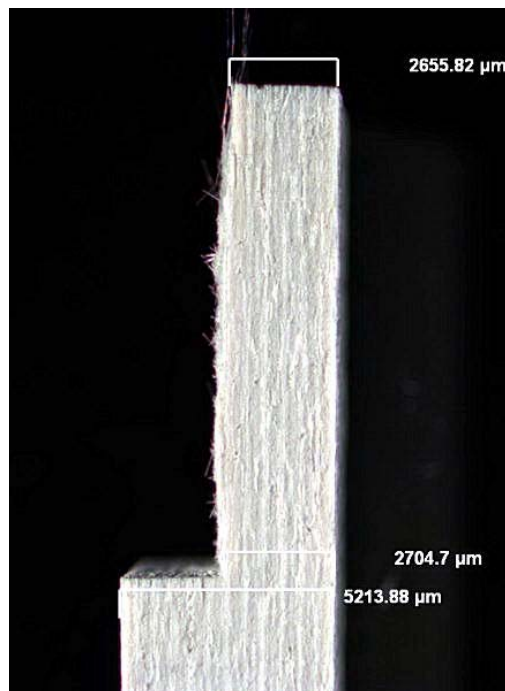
Side view of fracture surface of the N720/A specimen aged in steam at 1200°C for 24 h under zero load before compression to failure.
